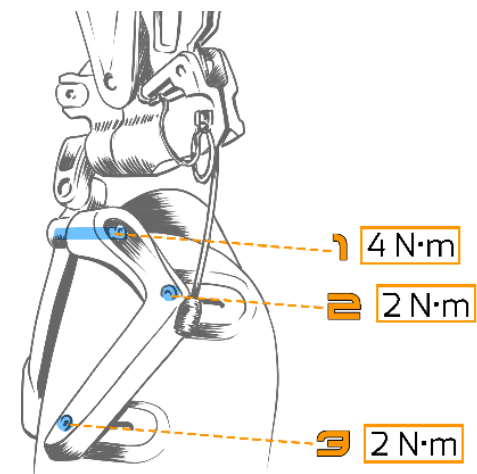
Appropriate Torque Values for the Shank Assembly.
